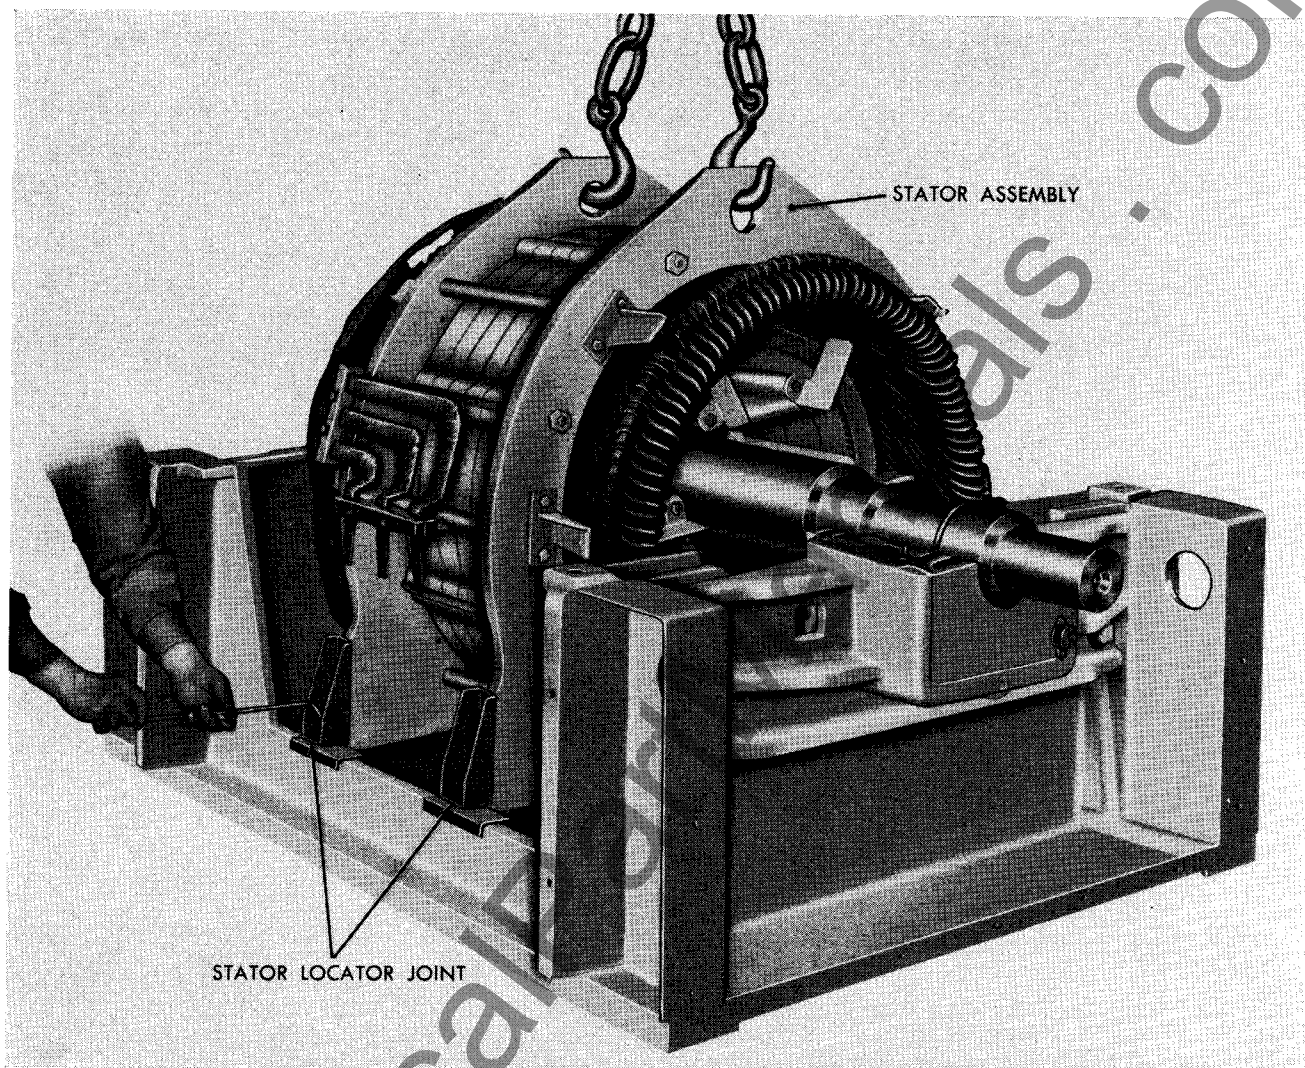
Unbolting Stator Assembly; Lifting Hooks in Place
